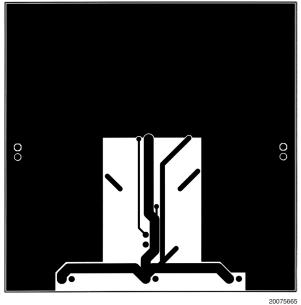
Recommended TS PCB Layout: Bottom Layer
